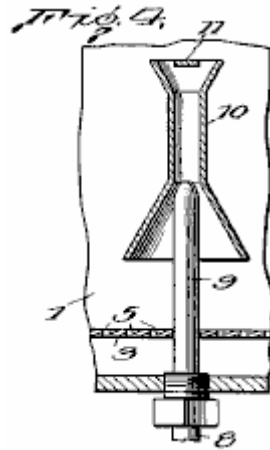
is a detail cross-sectional view showing the means for controlling the passage of gasses from the vapour expanding chamber into the intake manifold of the engine.
